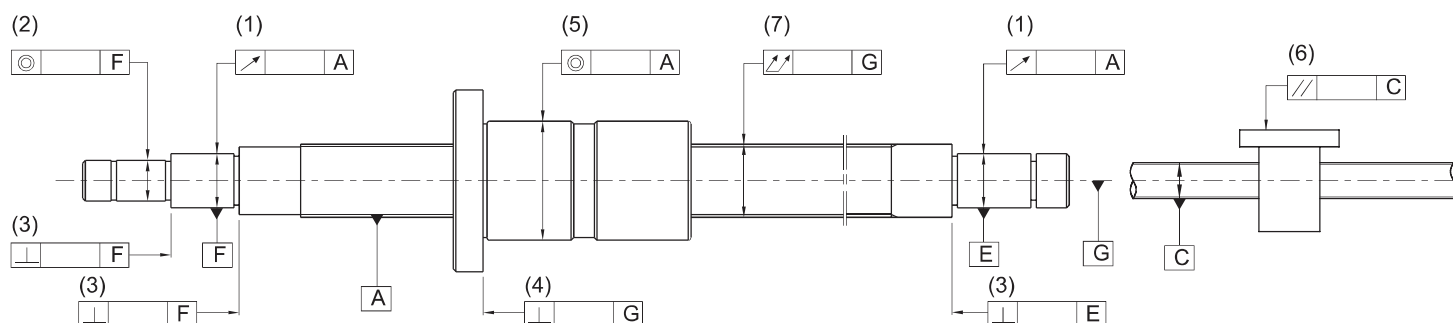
Mounting Accuracy and Tolerance
